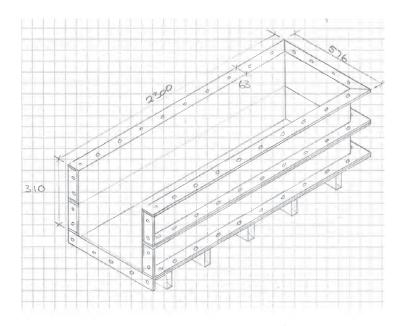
Isometric sketch of flume walls and base (end-plate, gasket, lid and bolts not shown) (dimensions in mm)
